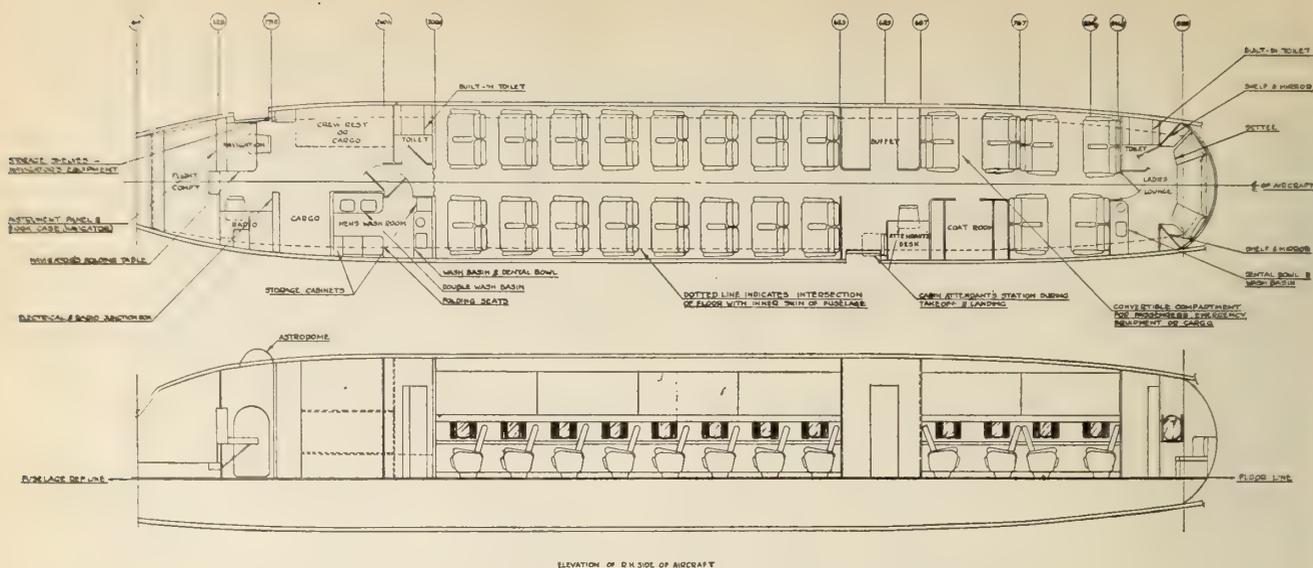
Plan and longitudinal section of typical fuselage interior.
